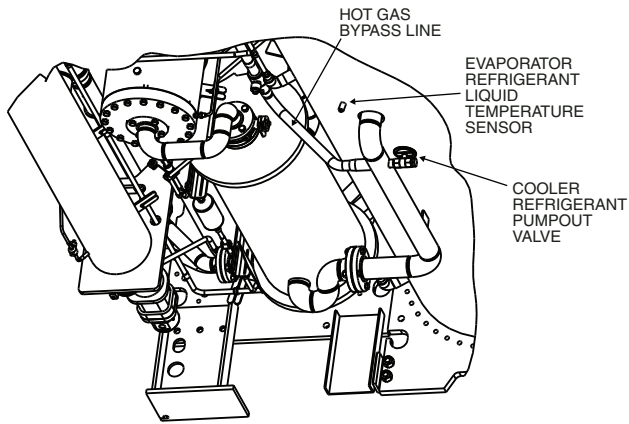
Evaporator Refrigerant Liquid Temperature Sensor on Bottom of Cooler (Units with Q,R Compressors Shown)
